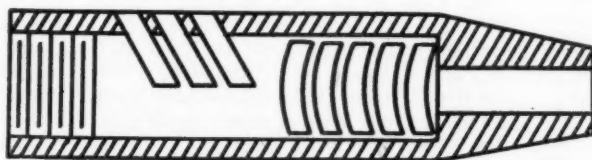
Sectional Drawing Most Efficient Form of .30 Caliber Compensator
